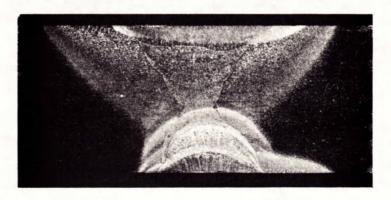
From weld specimen MR12. Metal-arc process, E7018 electrode, flat position.
